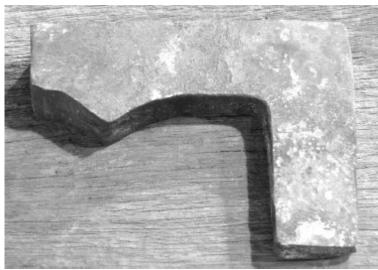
(left) A chisel was used to cut a slit into which the high carbon steel for the edge could be welded. Much of the blade could be cut with the back resting on the face of the anvil and the eye end over the edge. The rest had to be cut with the end of the bar standing up on the face of the anvil. Both operations required that a helper hold the axe in place. The tool steel bit was prepared by forging a wedge and pricking barbs on the thin edge with a chisel. The barbs help hold the steel in the cleft when weld-
